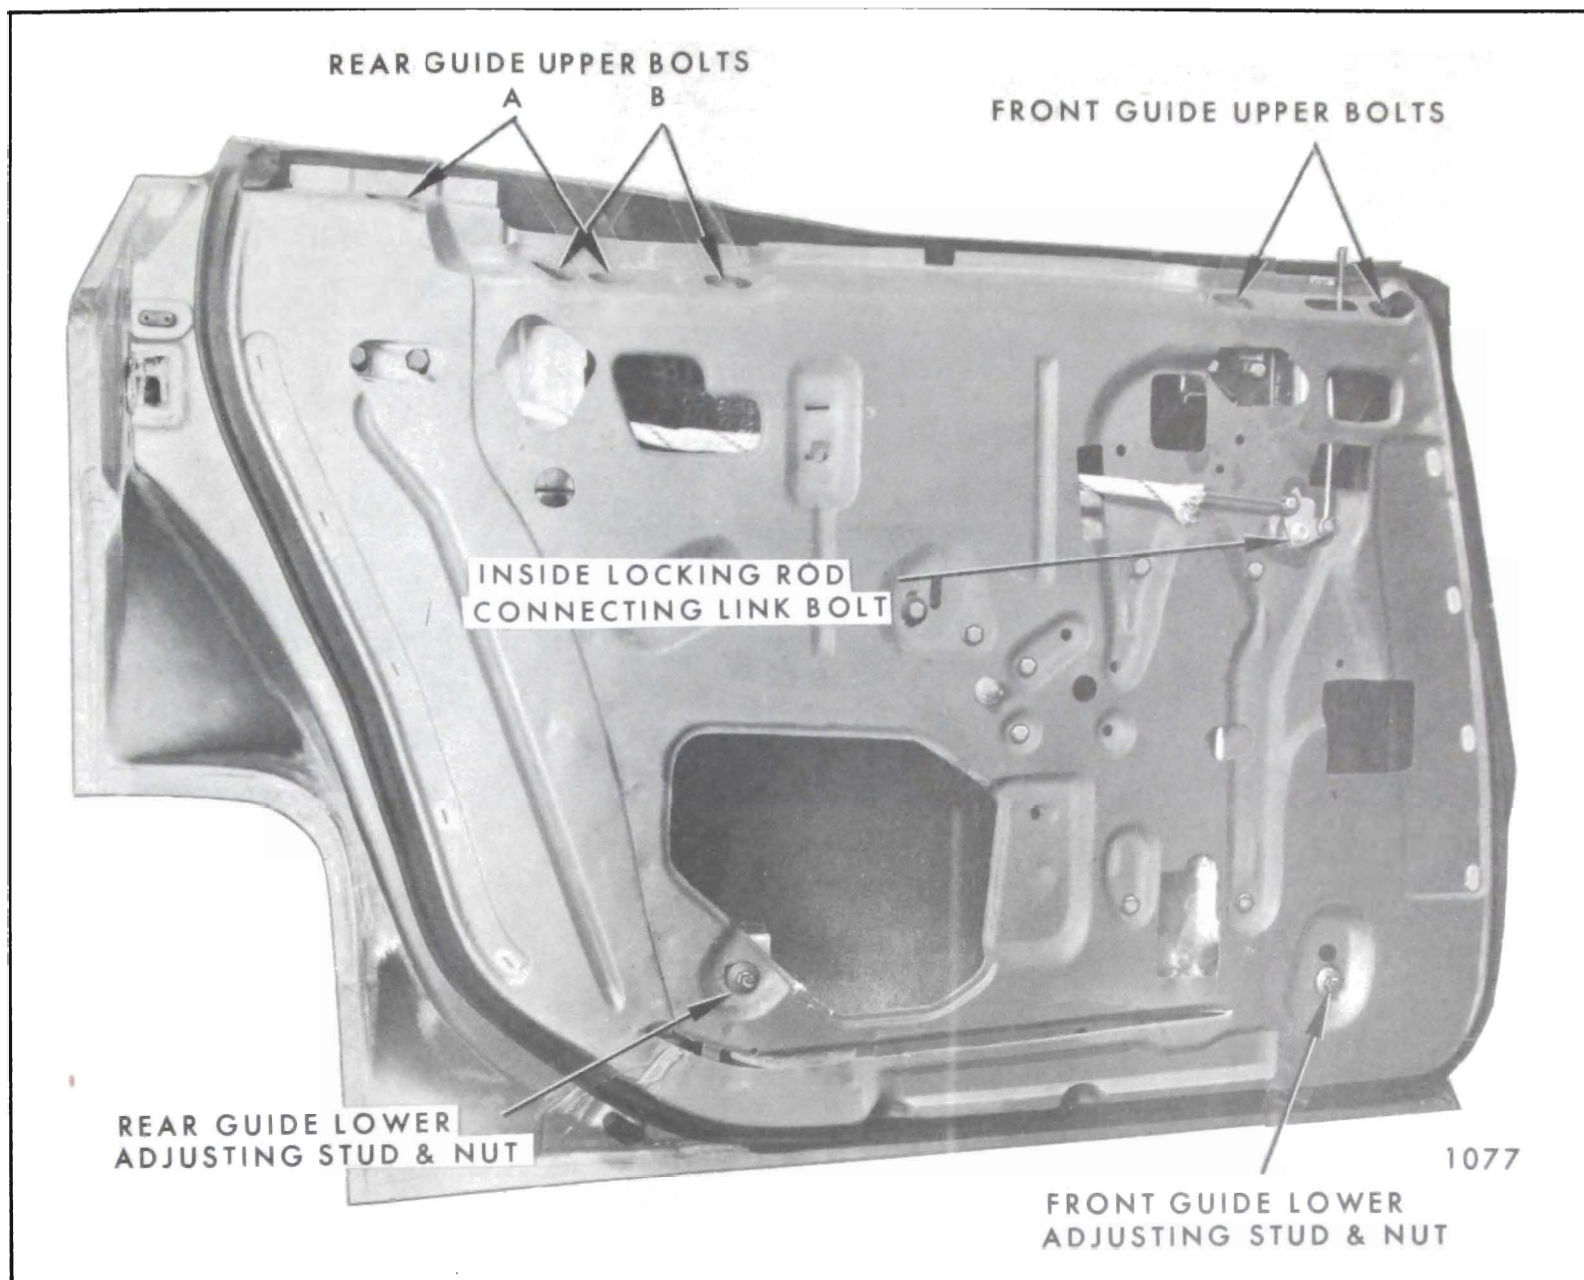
Rear Door Window Guides - "B & C-39 and C-69" Except 68069-68169 Styles
